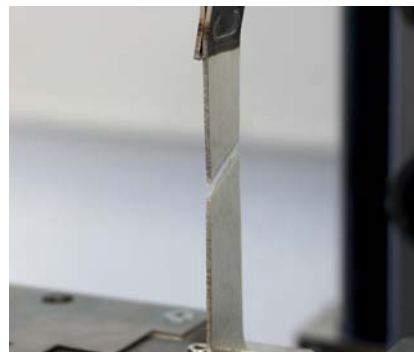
Laser welded sheet metal specimen after tensile test with failure outside the welding location
